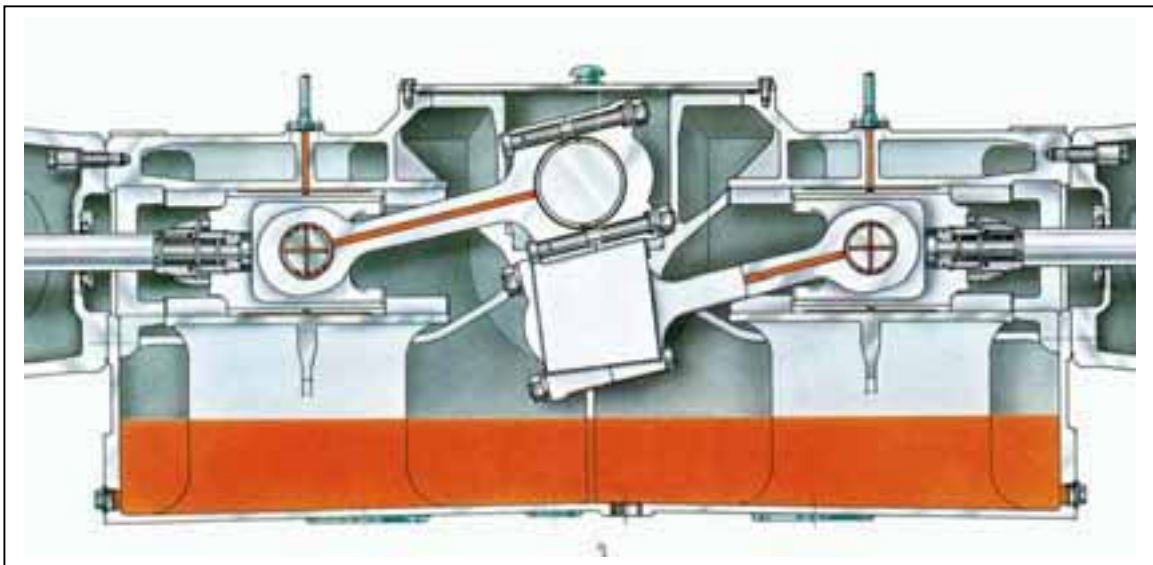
,4 – 8 Crankshaft Throws, Connecting Rods, Crossheads on Typical Opposed Cylinder Machine
